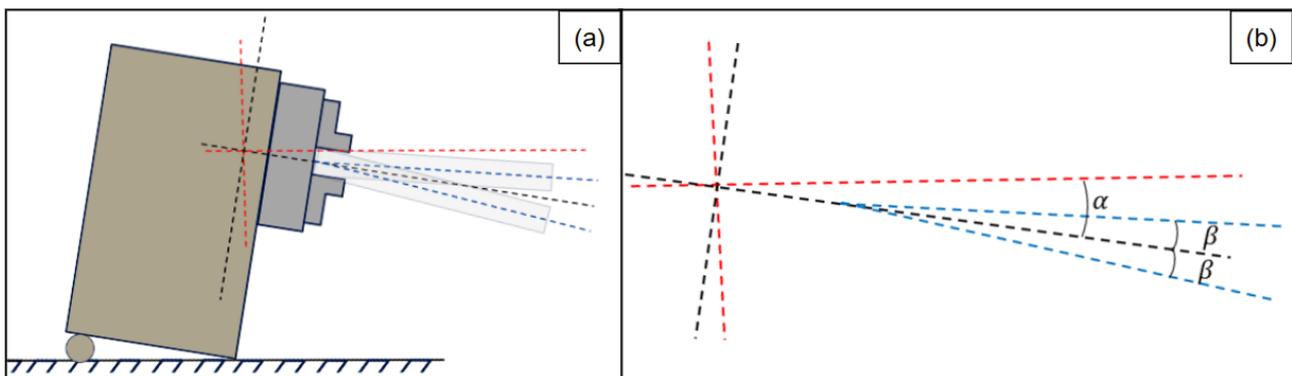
a) Schematics illustrating the misalignment between the reference line (red), the lathe's spindle axis (black) and the rod's longitudinal axis (blue). Perpendiculars to the reference line (red) and to the spindle axis (black) were added for clarity. b) Angles α and β .
